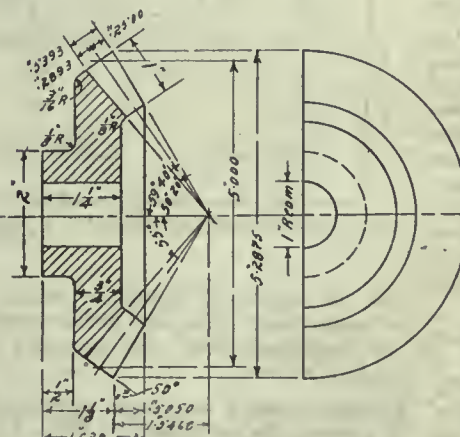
METHOD OF SHOWING THE DETAILS OF A BEVEL GEAR.
